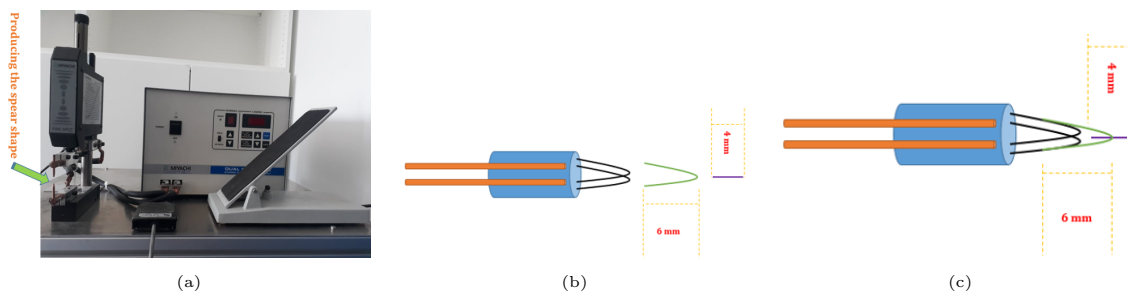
Spotting stages; using spotting machine(a); components to be spot welded(b); and schematic representation of the final outcome(c)
